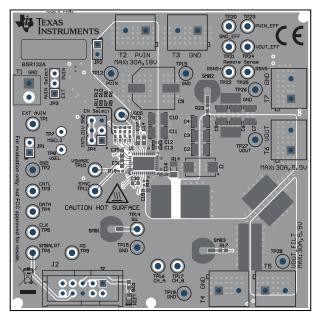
TPS546B24AEVM-1PH Top Side Component View (Top View)
